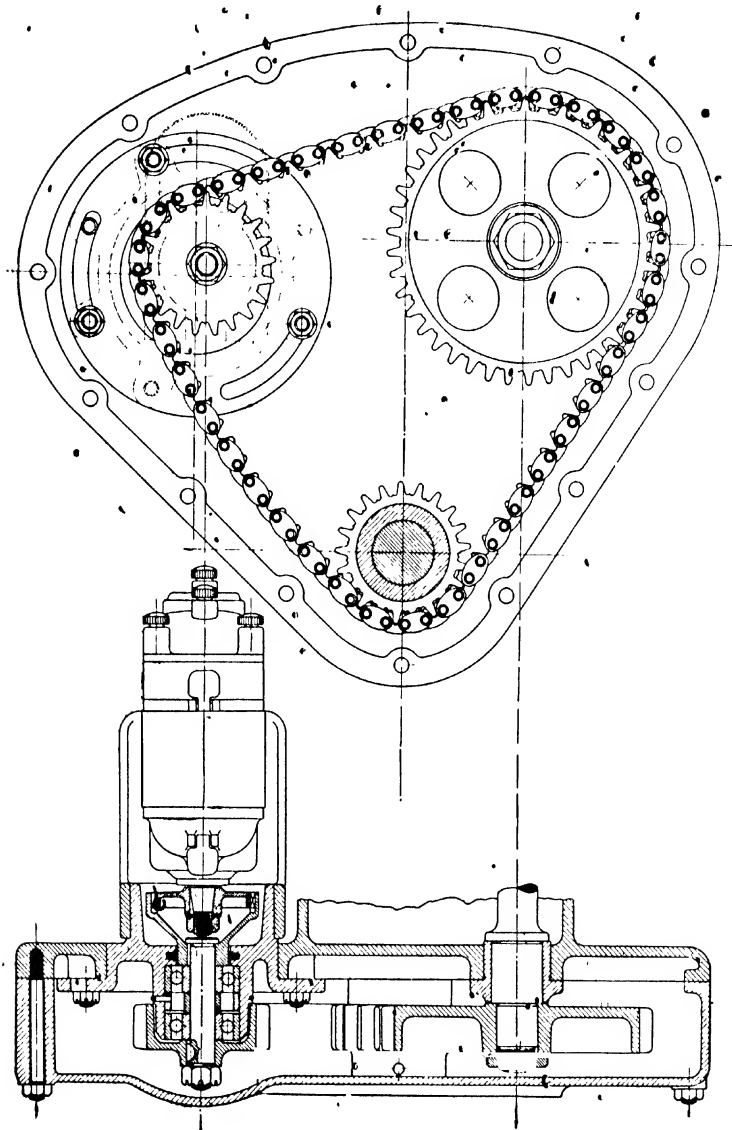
Single Chain triangulated Drive with eccentric Adjustment
